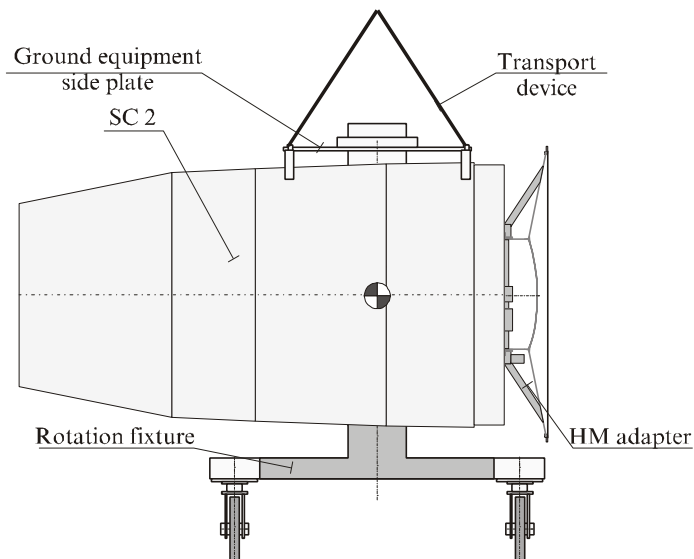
Spacecraft with HM adapter on Customer's rotation fixture in horizontal position
